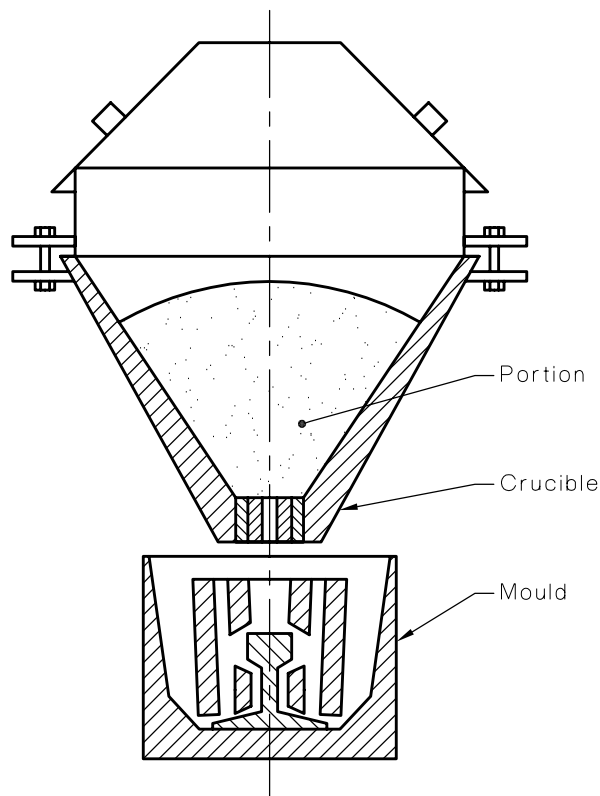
ALUMINOTHERMIC WELDING
